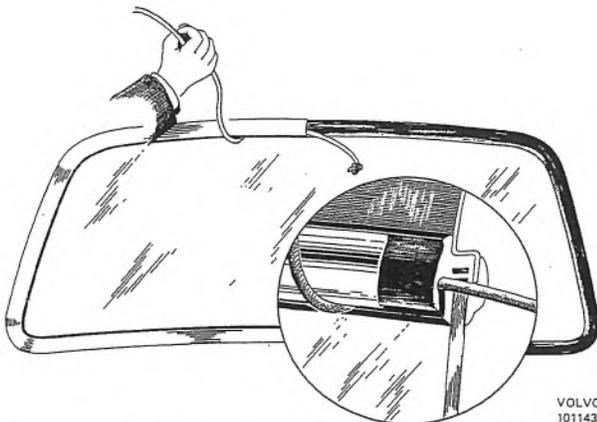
Fitting trim moulding for windshield and tailgate
